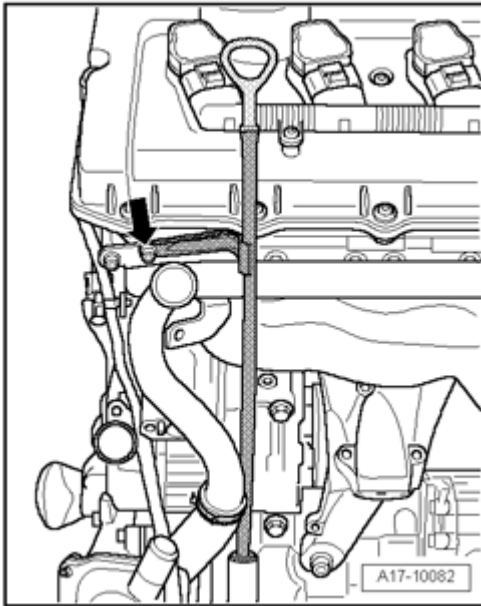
Removing Guide Pipe For Oil Dipstick At Cylinder Head
